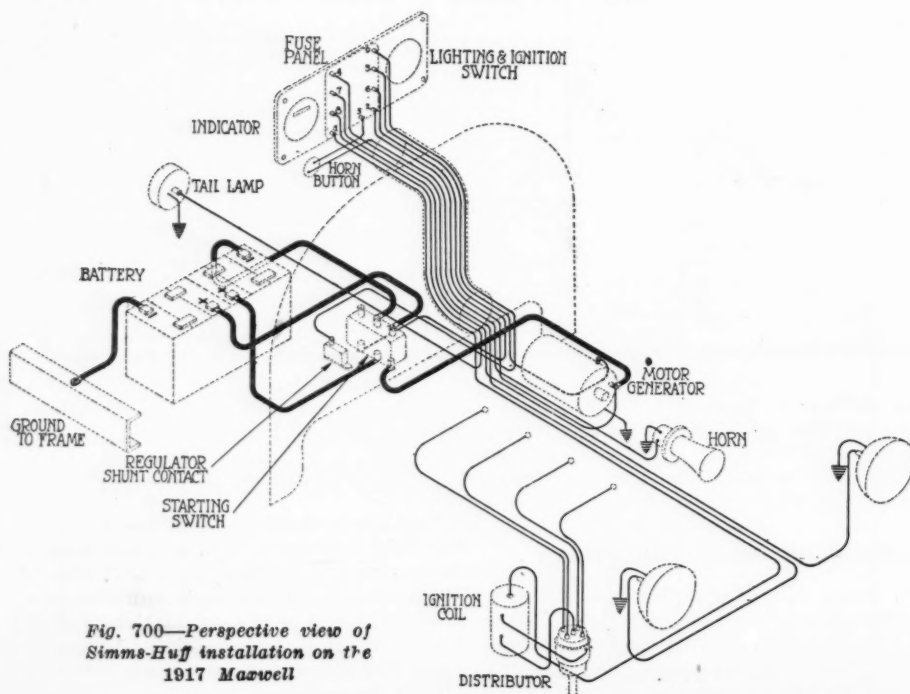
Perspective view of Simms-Huff installation on the 1917 Maxwell
